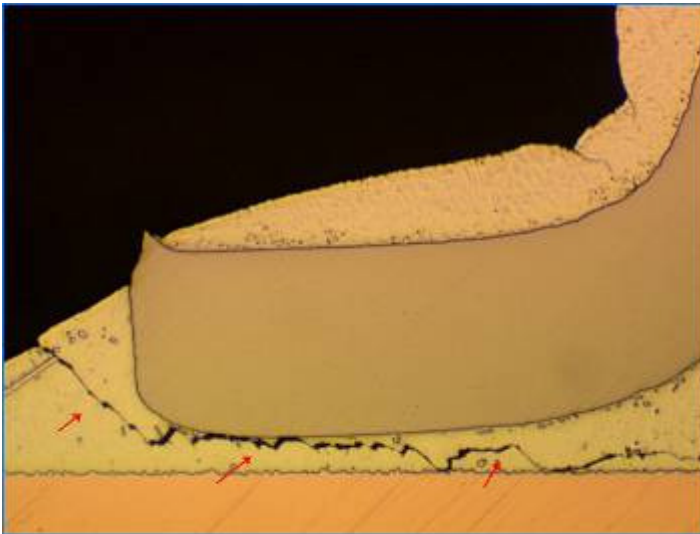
cross section, SN64, U62, left lead solder crack, 200xa
